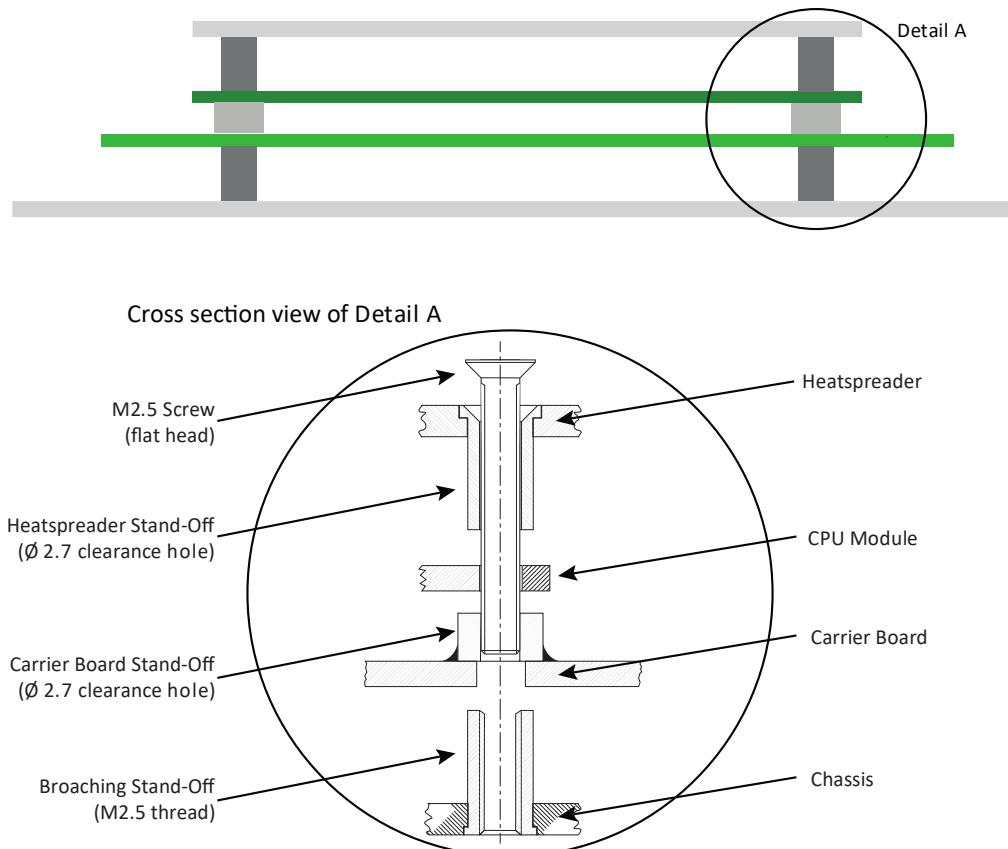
Heat Spreader Assembly Mounting to Carrier and Chassis – Top Side Screw Access
